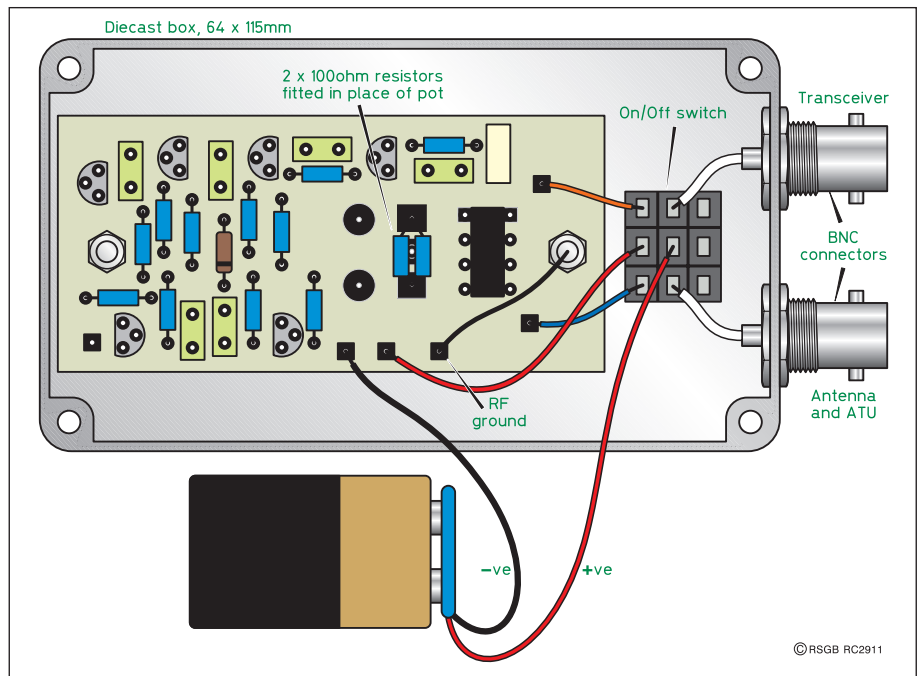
The mounting of the PCB inside the diecast aluminium box.
